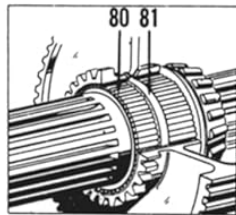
Models TO20, and TO30 main shaft first gear and countershaft third gear needle bearings installation. Similar gears in model TE20 rotate on bronze bushings.
